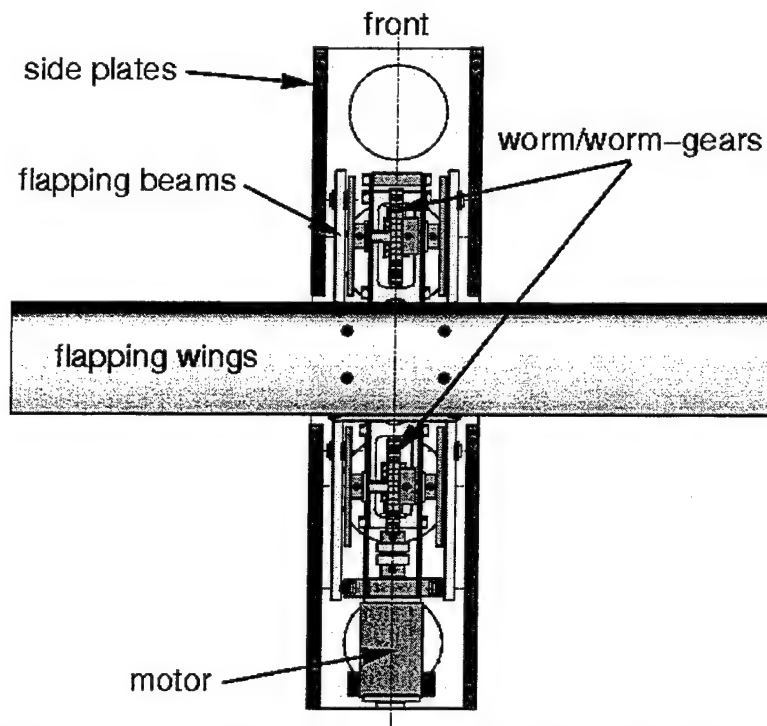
Top View of Flapping Mechanism. After Ref. 5.
